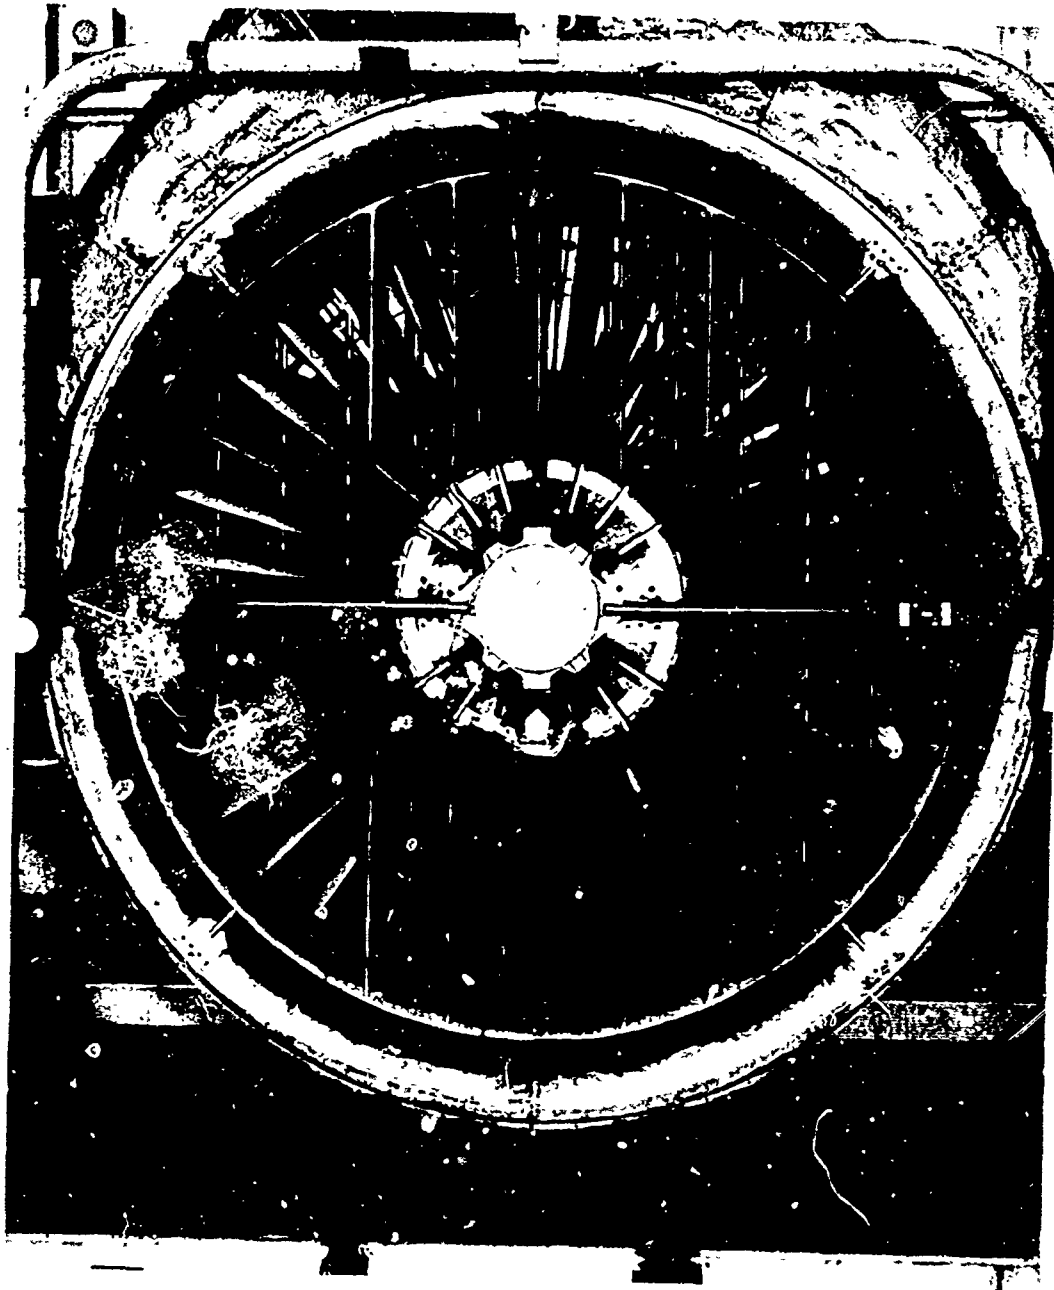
LIFT FAN ASSEMBLY SHOWING INLET VANE
